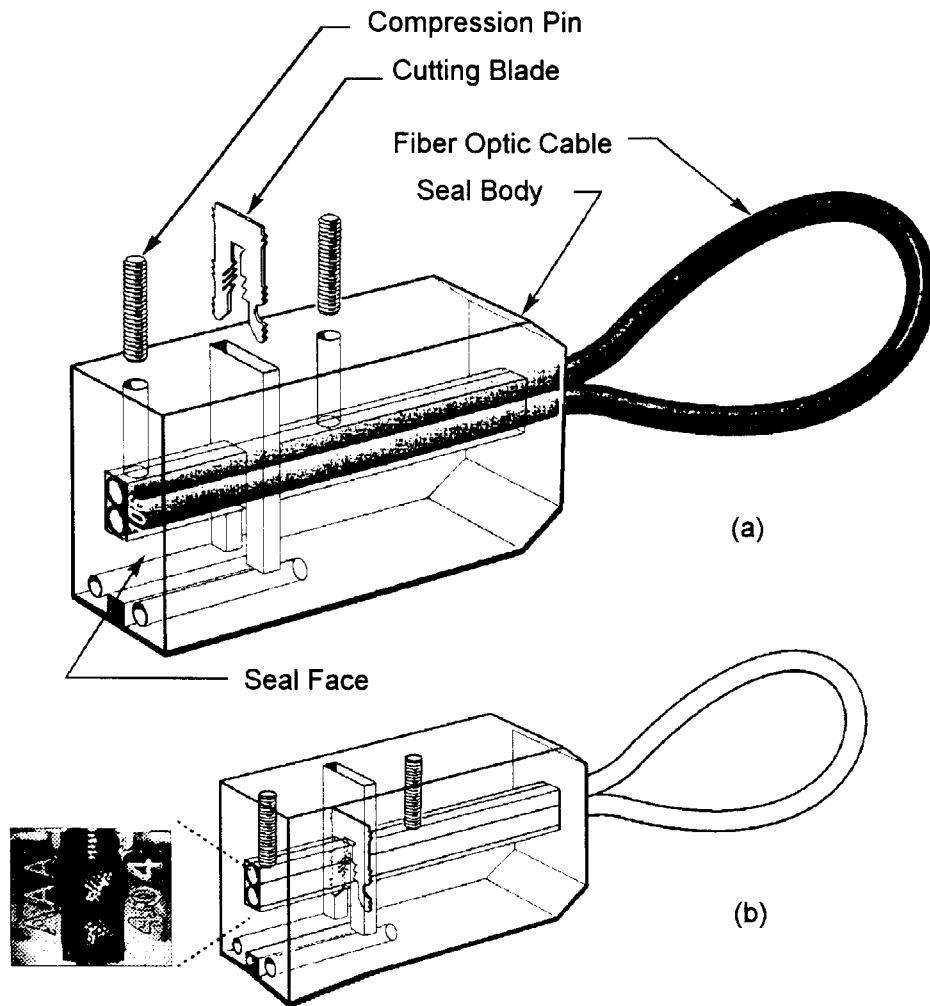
COBRA seal assembly ((a) before installed, (b) after installed)
